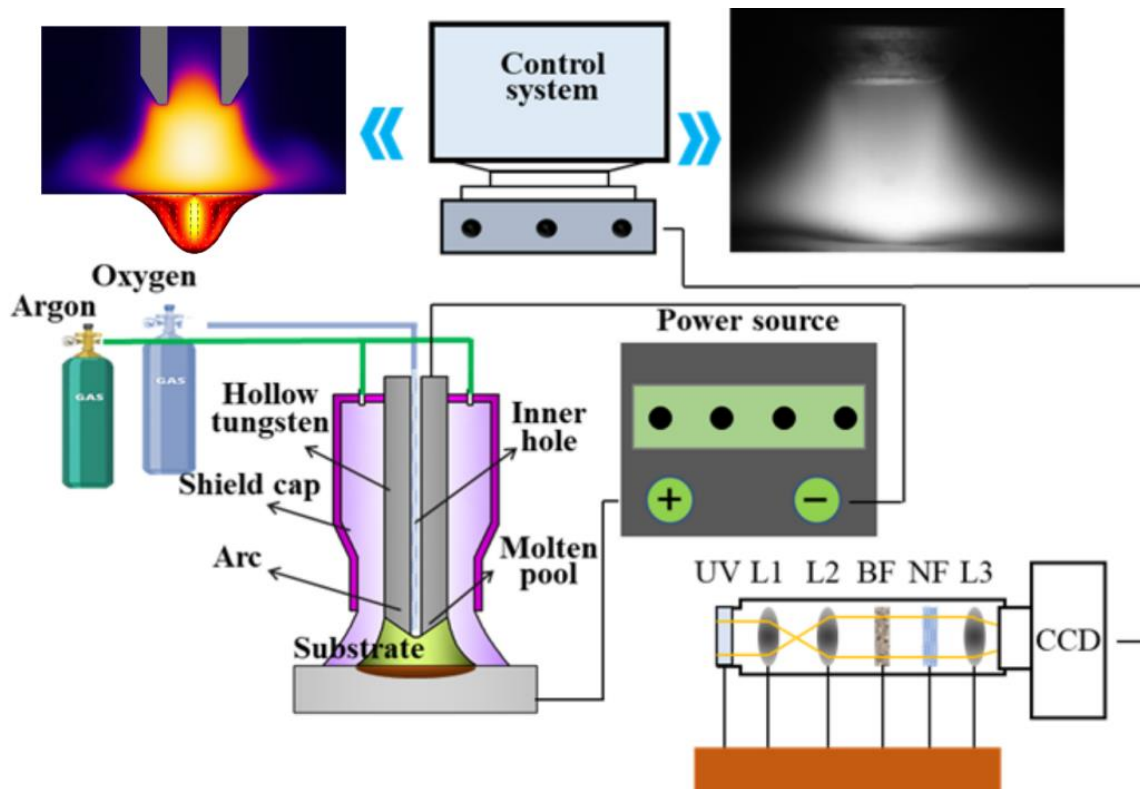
The mechanism and the experimental system of hollow cathode arc welding (HCAW).
